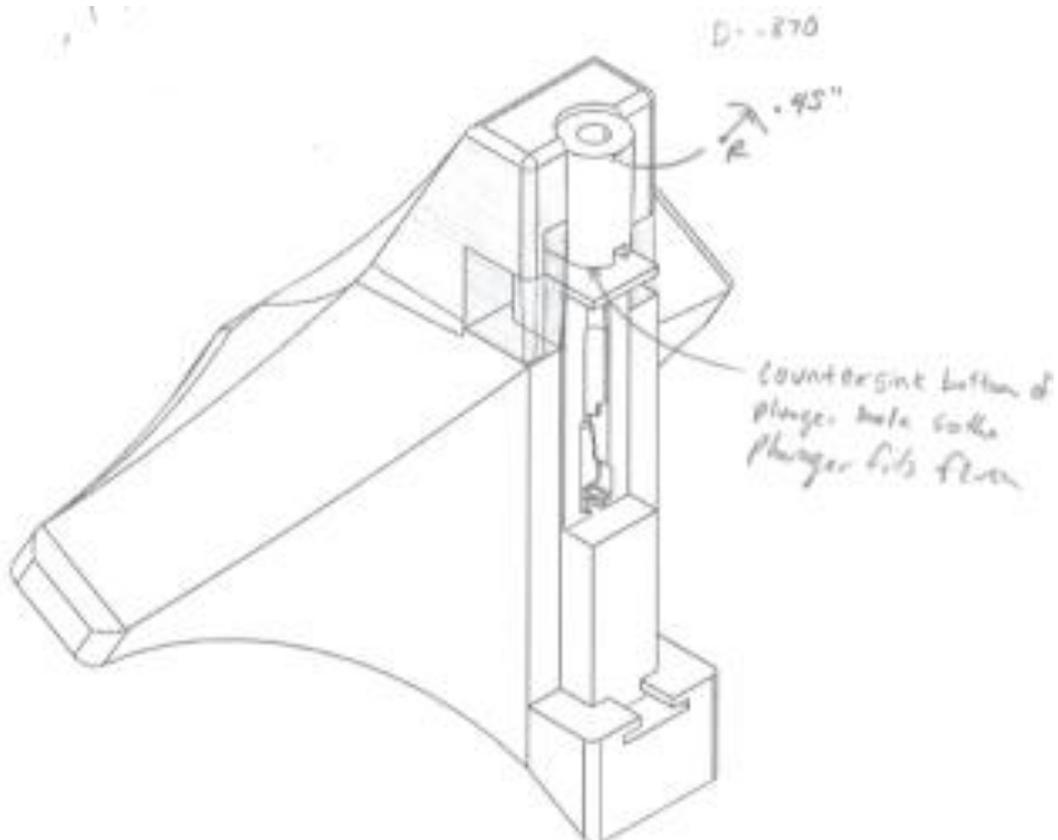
Sketch showing the complete assembly of ready-to-use extraction device with insert
